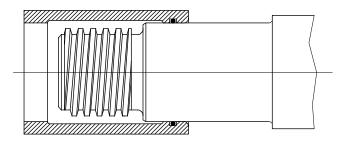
Standard LCV Shaft Sleeve Arrangement
